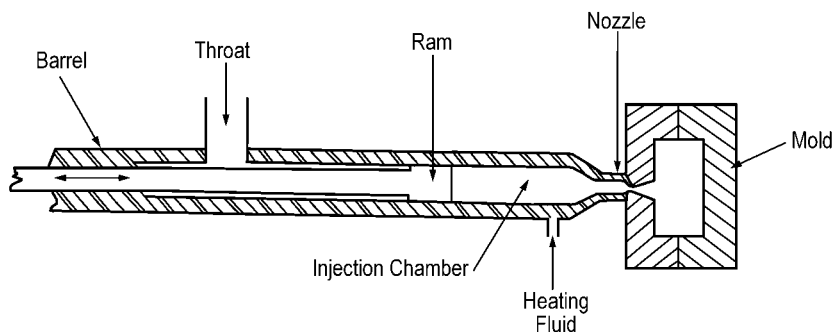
Ram type injection molding machine (courtesy of J. Sommer and Rubber Division ACS [4])
